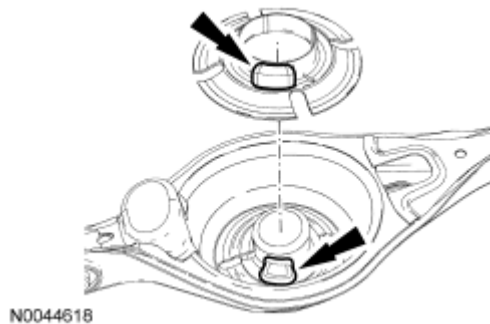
Locating Spring Lower Seat Into Lower Arm
